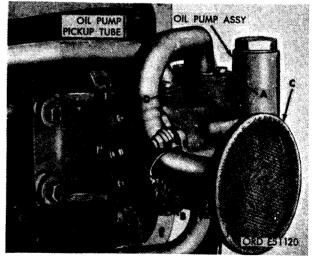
REMOVING OR INSTALLING PRESSURE OIL PUMP PICKUP TUBE.
